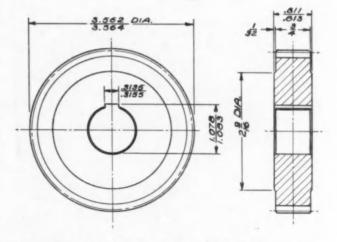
Rear unit center gear for Hydra Matic transmission
